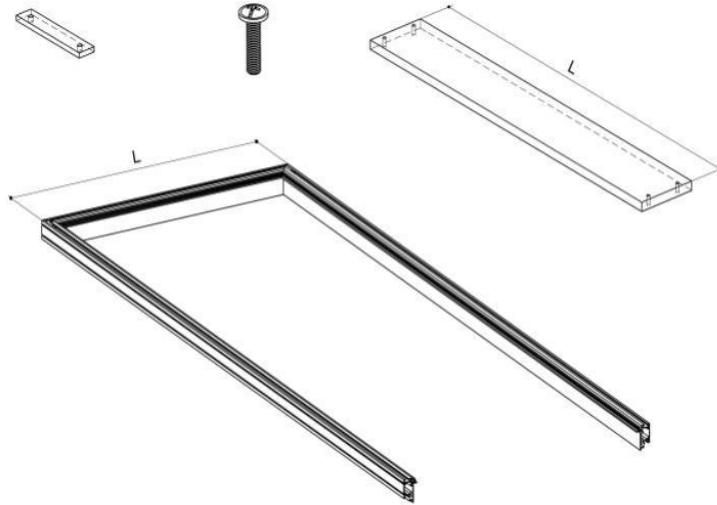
Distance bar and mounting plate kit (used when installing frame without door leaf)
